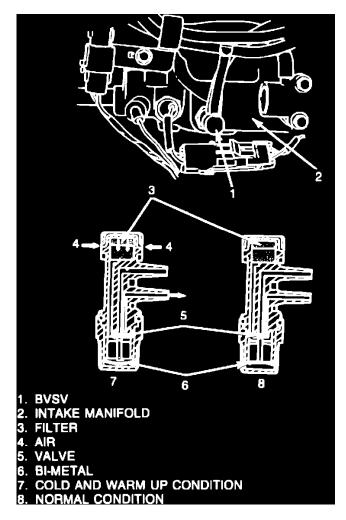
Bi-metal vacuum switching valve (BVSV)
